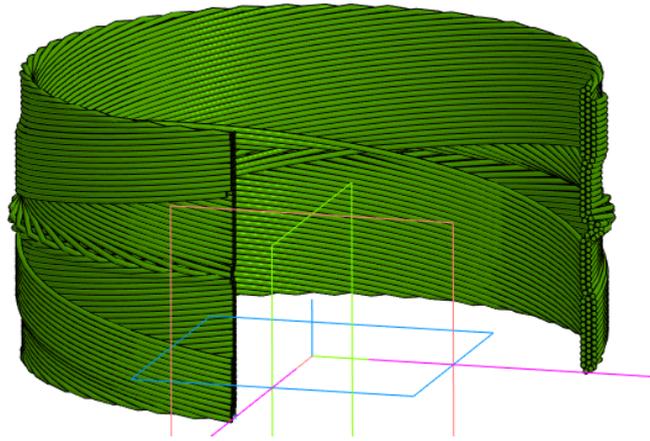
Computer model of thread winding with a closed structure, gear ratio $u = \frac{249}{124}$
